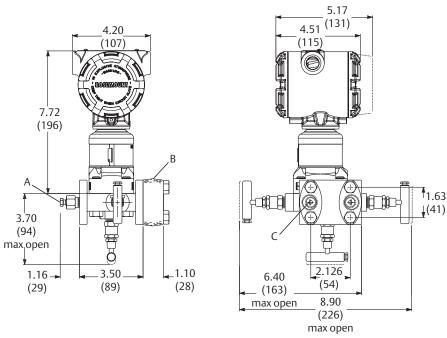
Rosemount 305 Two Valve Traditional Style Manifold
